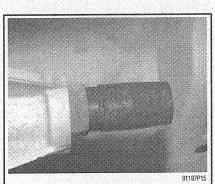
Insert a plug onto the splines of the transmission output shaft to prevent fluid from leaking out
